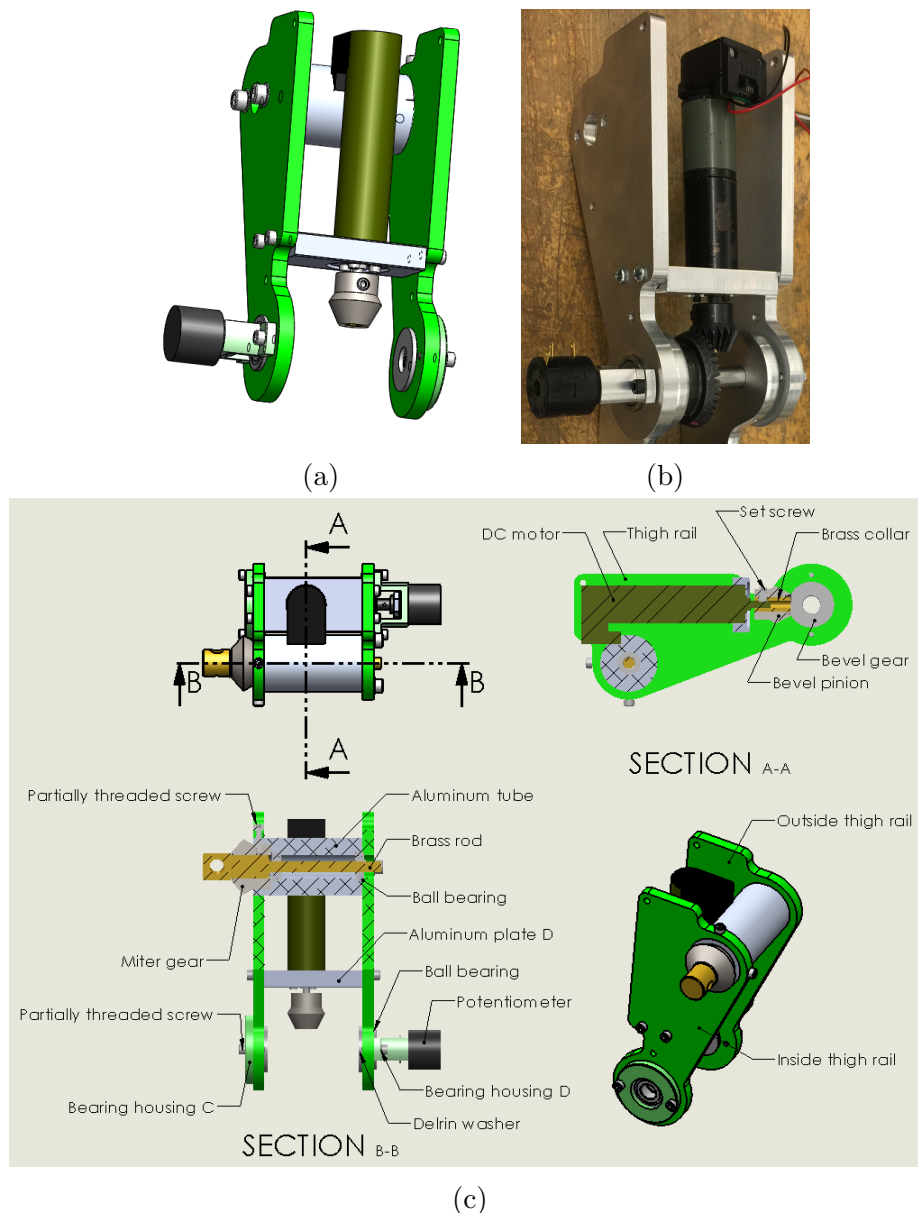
Illustrations of the thigh part: (a) the CAD model of the thigh part with the brass rod, (b) the assembly of the thigh part and (c) Section views of the CAD model of the thigh part with the brass rod.
